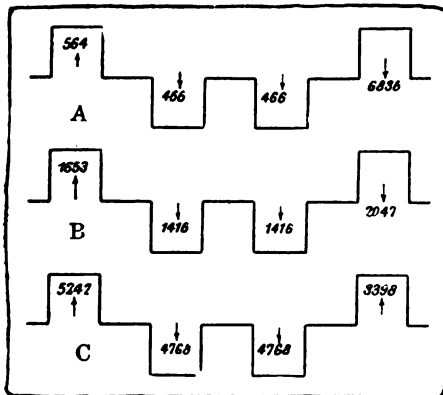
Maximum forces producing bending stresses of crankshaft and pressures in shaft bearings
